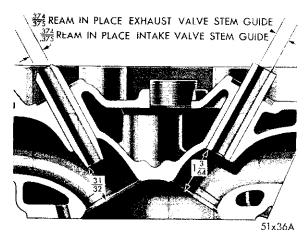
Exhaust and Intake Valve Guide Installed in Head (FirePower)
